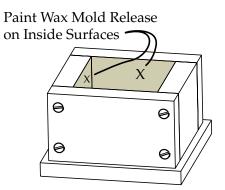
Here the exterior part of the mold is screwed together and a layer of mold release (a. k. a.. parting agent) is applied to the inside of the mold.
